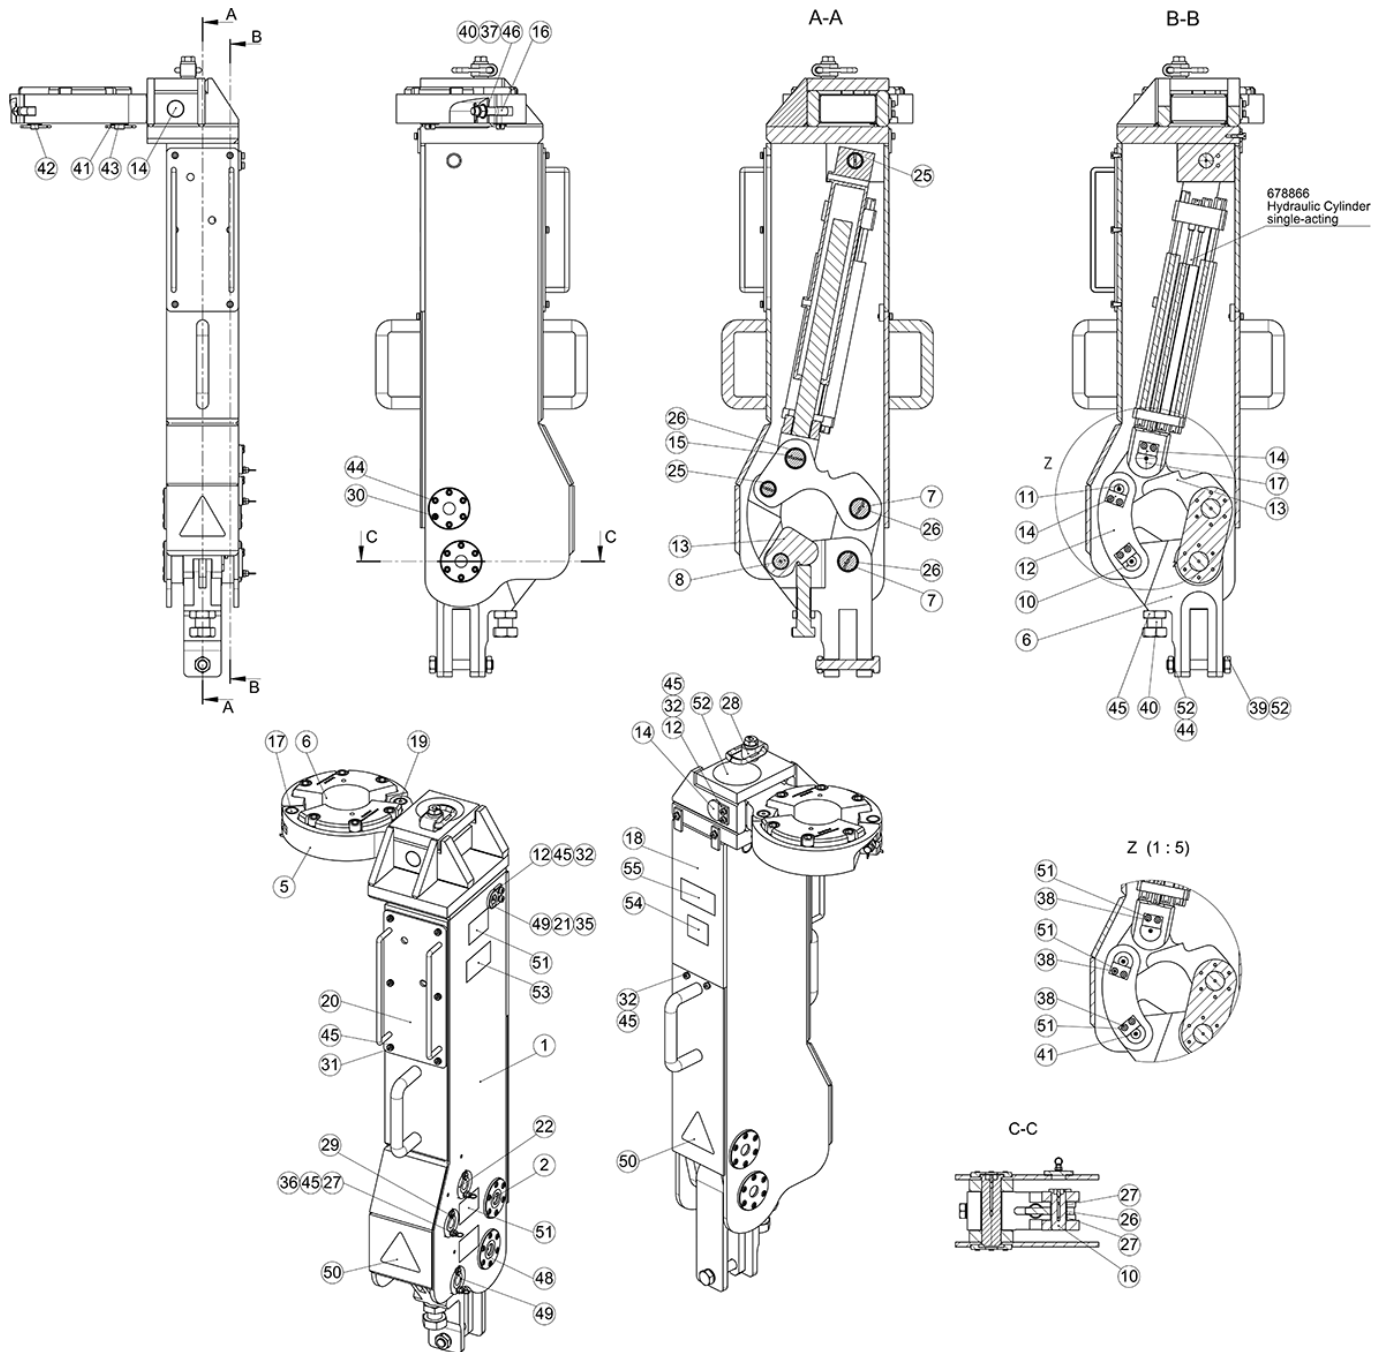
678801 Single Elevator Rotation System Drawing I
